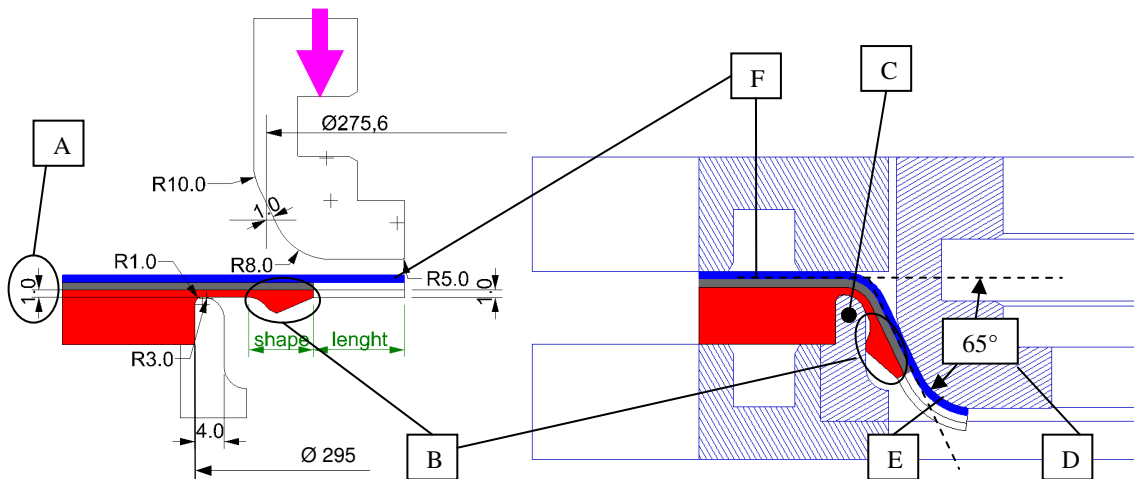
shape and main dimensions (in millimetres) of the finger and the tooling for the driver hole rim forming (before-left and after-right)
